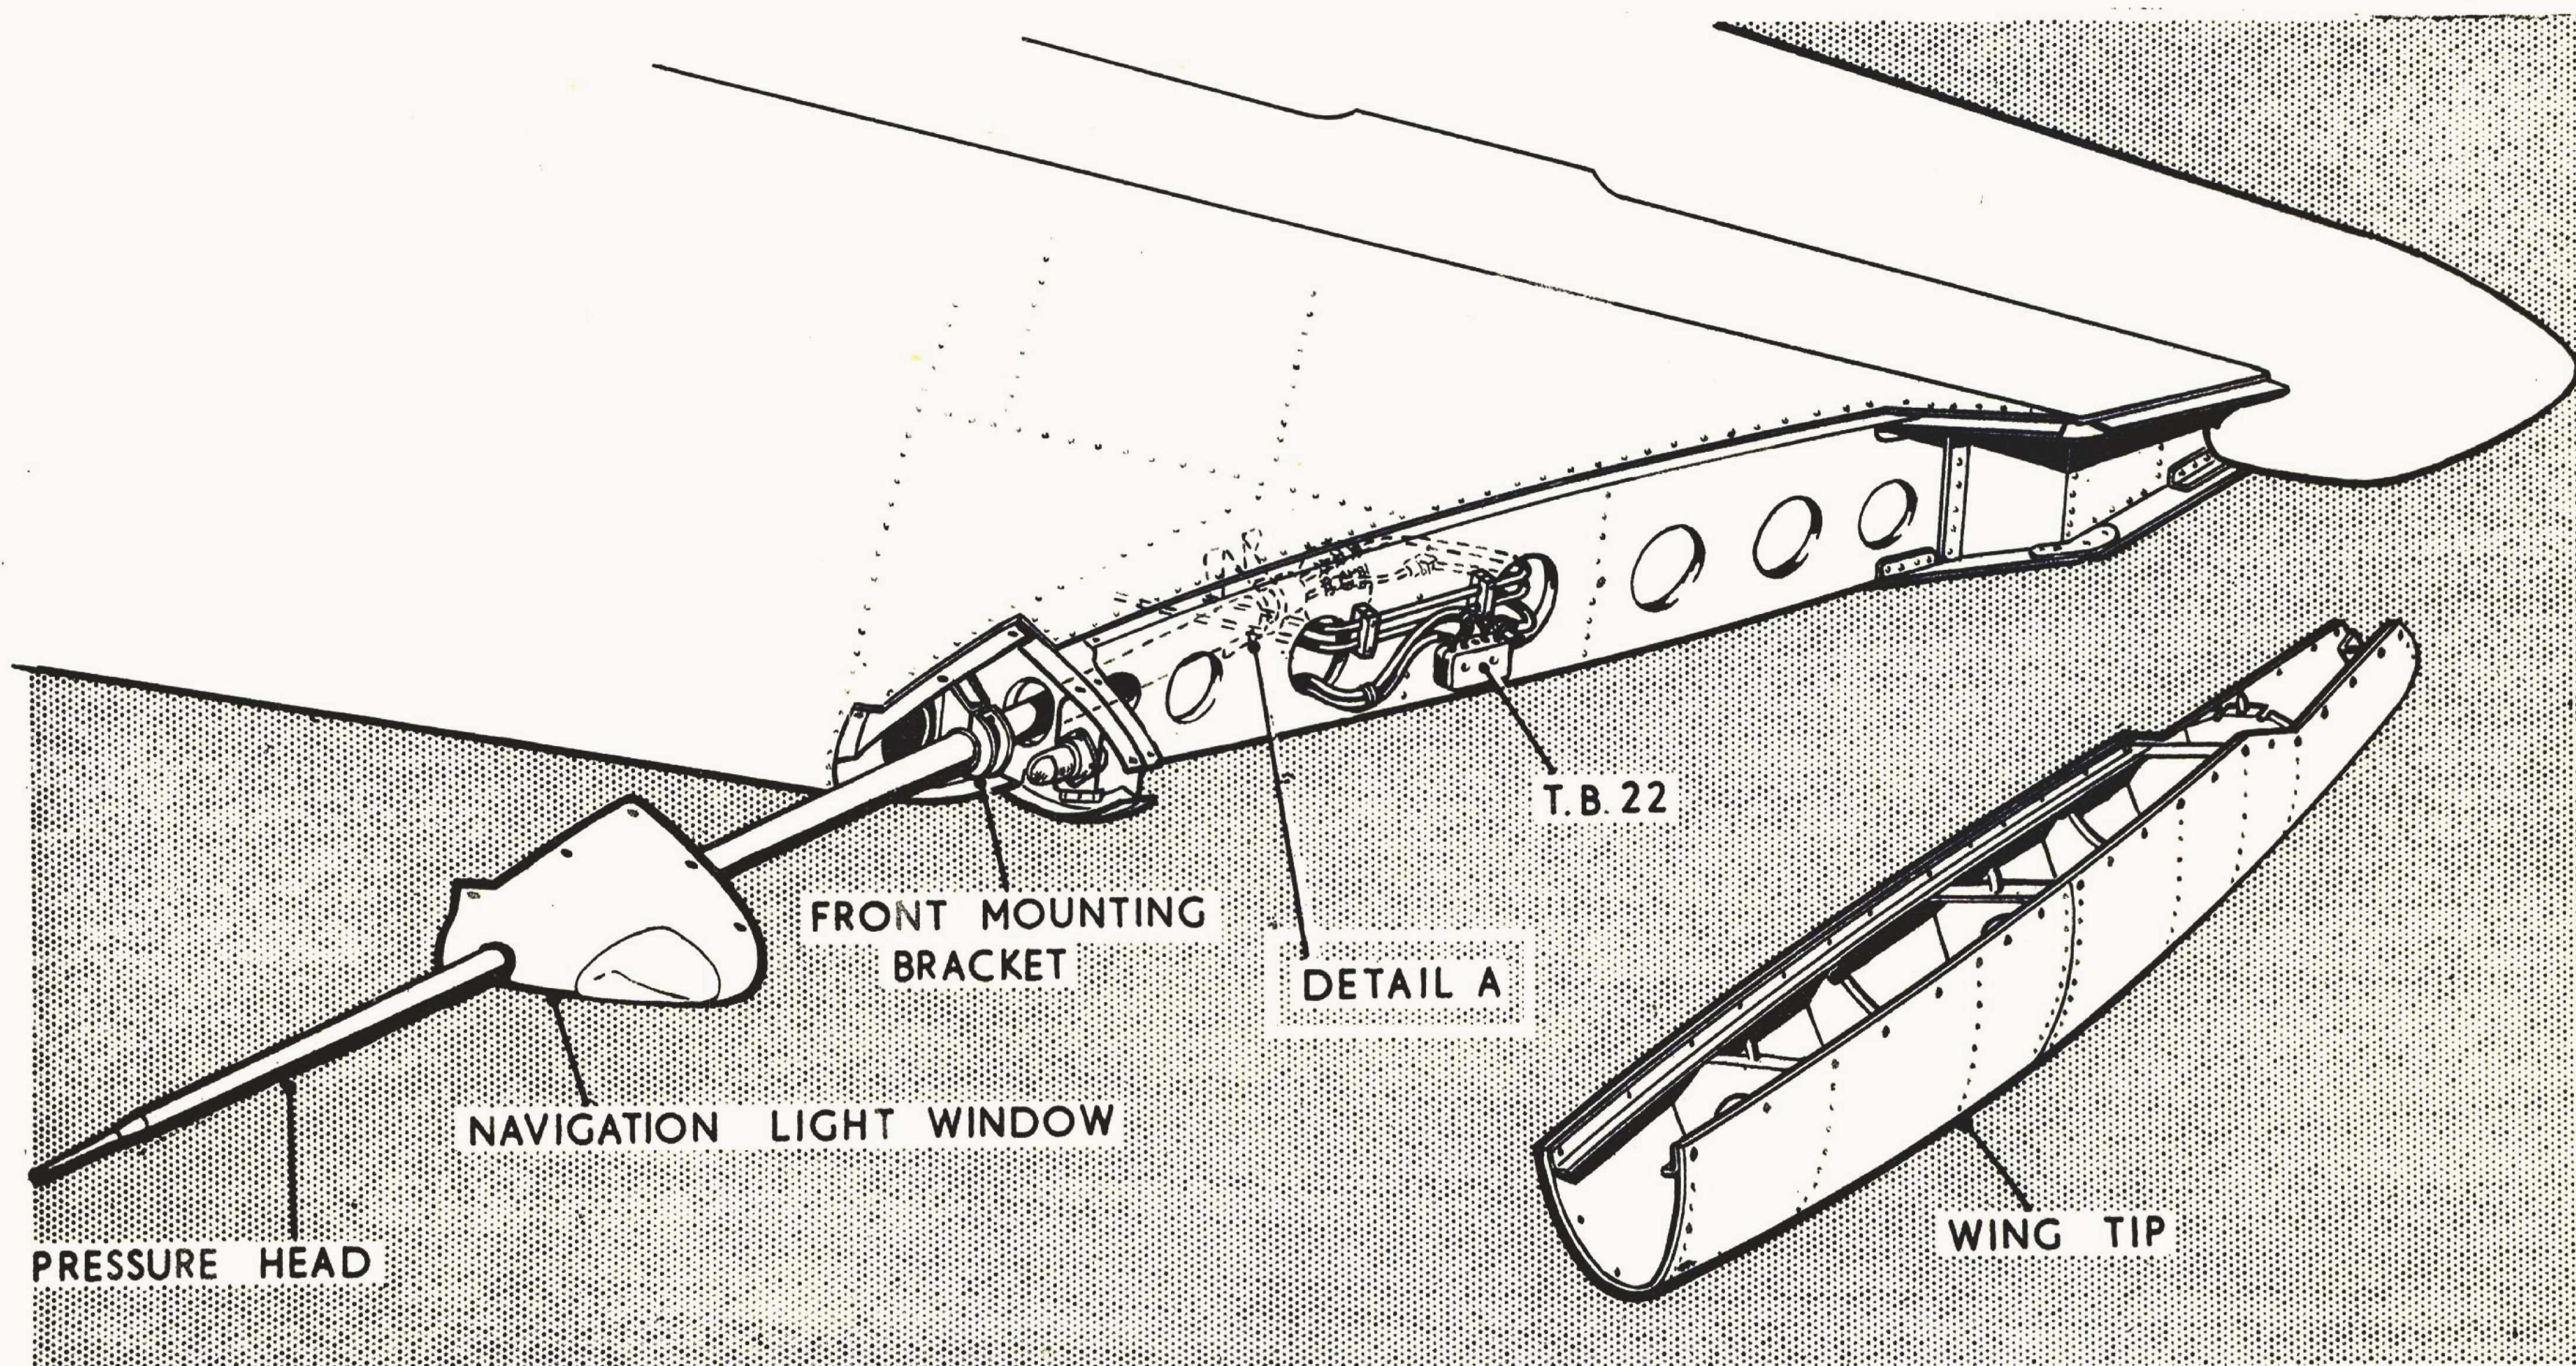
REMOVING WING TIP & PRESSURE HEAD
